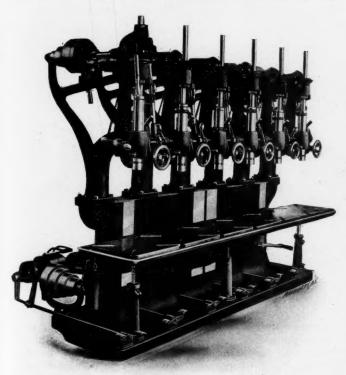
Twenty-inch Six-spindle Gang Drill, built by the Mechanics' Machine Co., Rockford, Ill.
